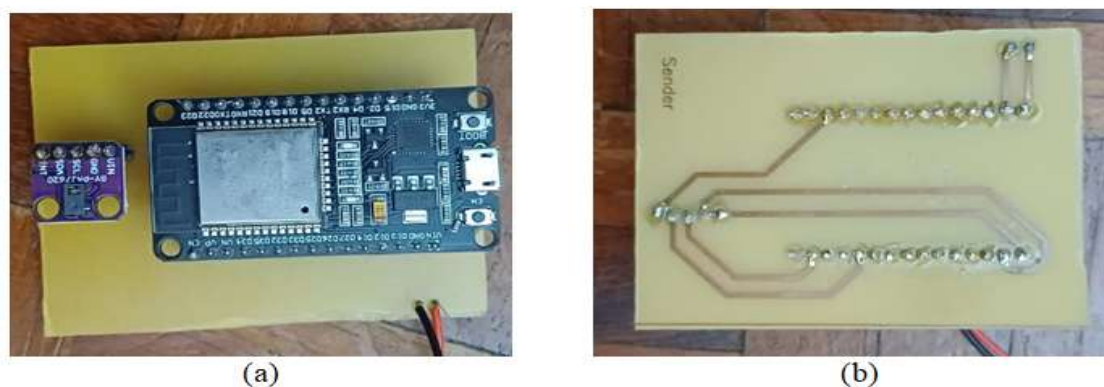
Transmitter PCB Board Views: (a) Top View, and (b) Bottom View
